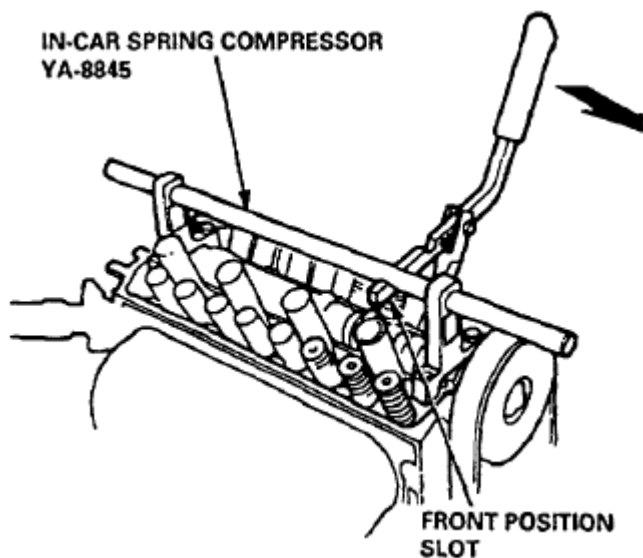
Identifying Compressor Attachment Rests On Top Of Retainer
